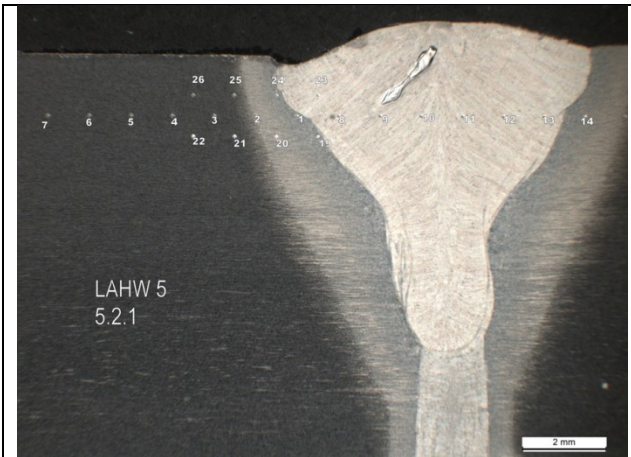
Measuring points of LAHW welded sample 5.
